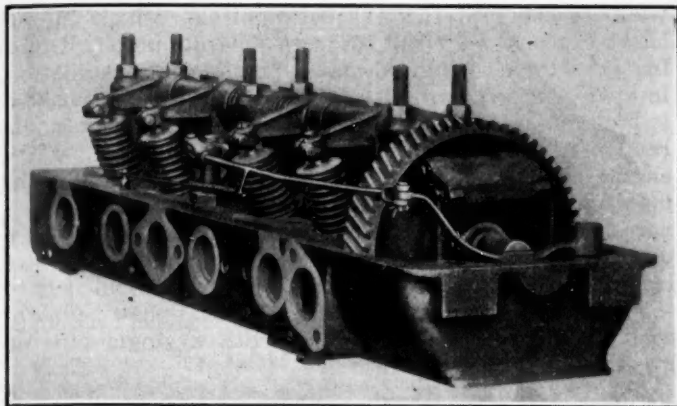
INTERCHANGEABLE CYLINDER-HEAD ASSEMBLY
